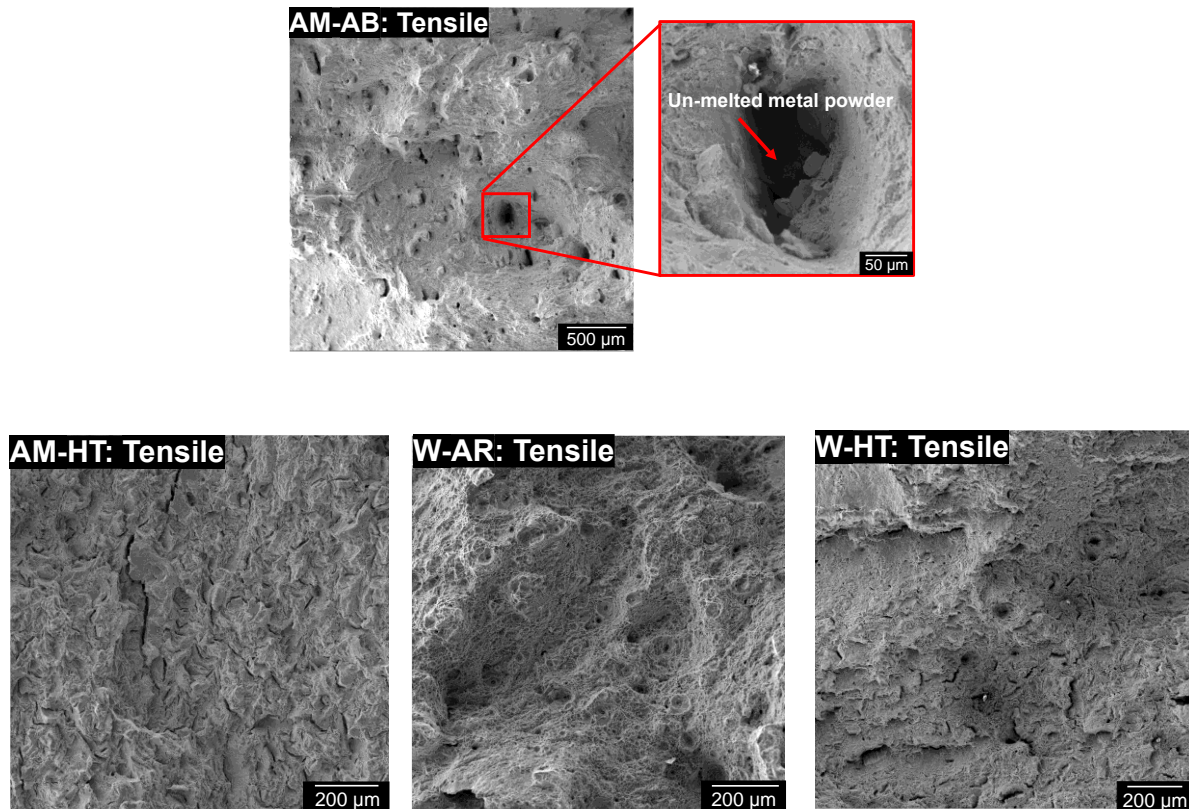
Sample fracture surface resulting from uni-directional tension test. Top: AM-AB sample. Bottom: AM-HT, W-AR and W-HT samples.
